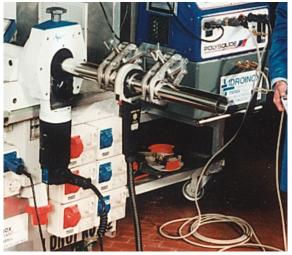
Closed head for tube to tube orbital welding. COURTESY OF POLYSOUDE
